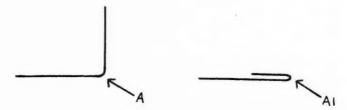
Showing point at which wire should be heated slightly, but not to red heat, in making the bend for a recurved spring.
